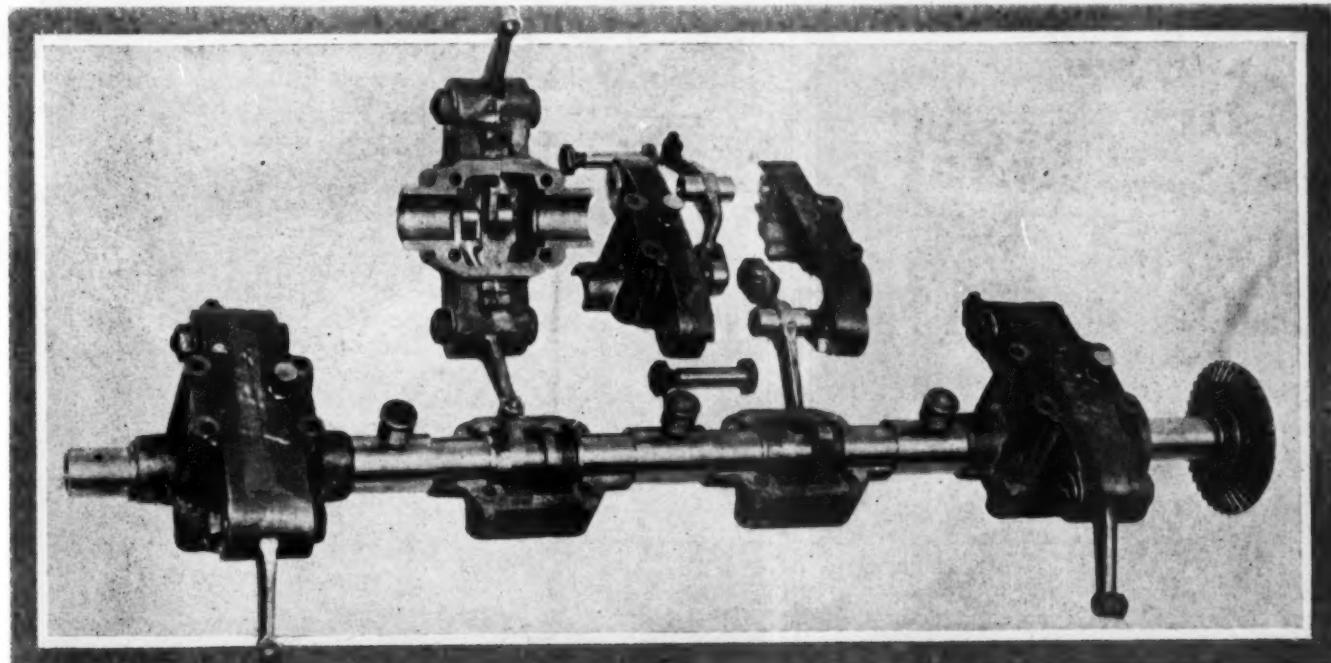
Showing details of camshaft rockerarm construction, with bevel gear for Models 40 and 50. Chain drive for Model 30 not shown
